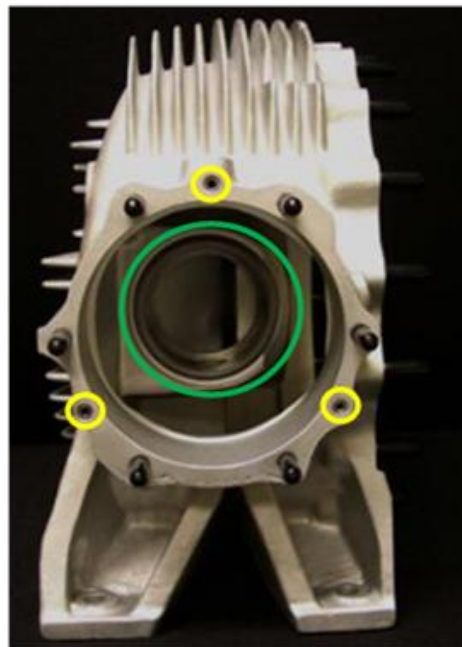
Tail rotor gearbox housing. Small machine face contains six studs (black caps), three helicoil inserts (yellow), and steel liner in housing body (green).
